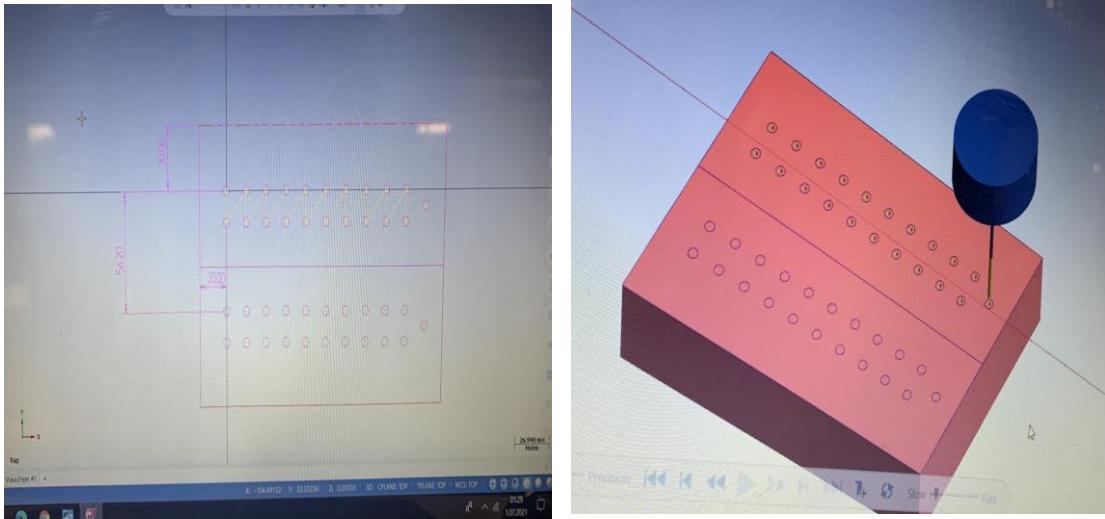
Digital drawings made on the computer connected to the CNC Milling machine
